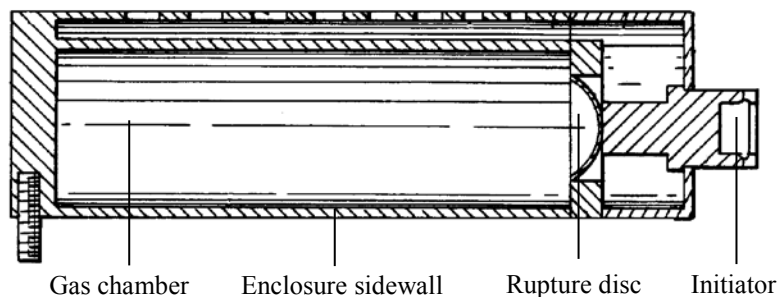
Compressed gas inflator assembly (Ellis et al., 1998)
